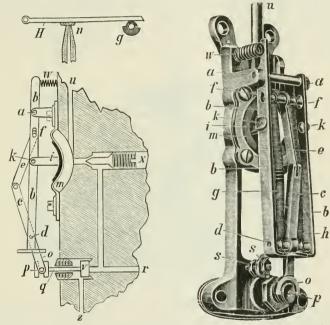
Controlling mechanism. Fig. 6.—Controlling mechanism.
